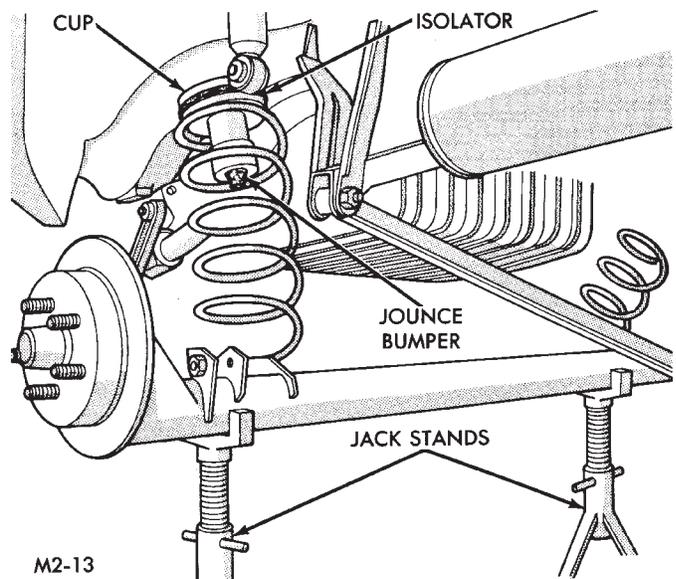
Remove/Install Coil Spring and Isolator Assembly
